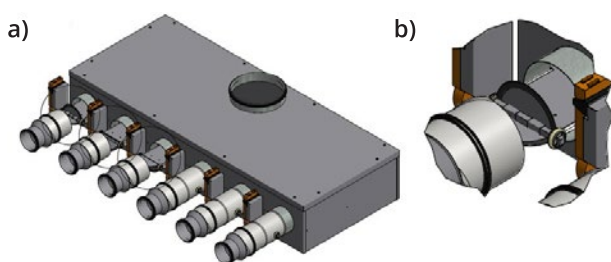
Illustration of the manifold – the 3D view (a), the heat valve detail (b).
